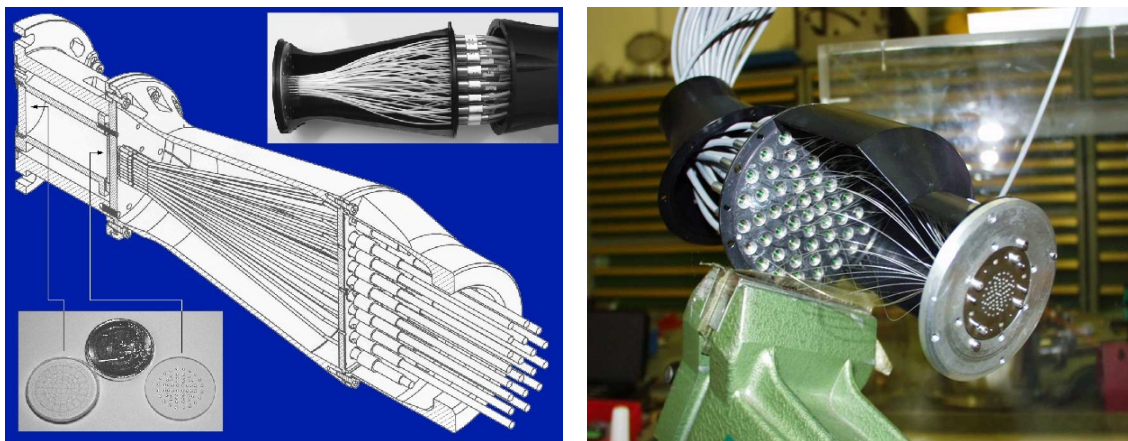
Front-end assembly of the 60 fiber bundle which guide the light to the sensors.
